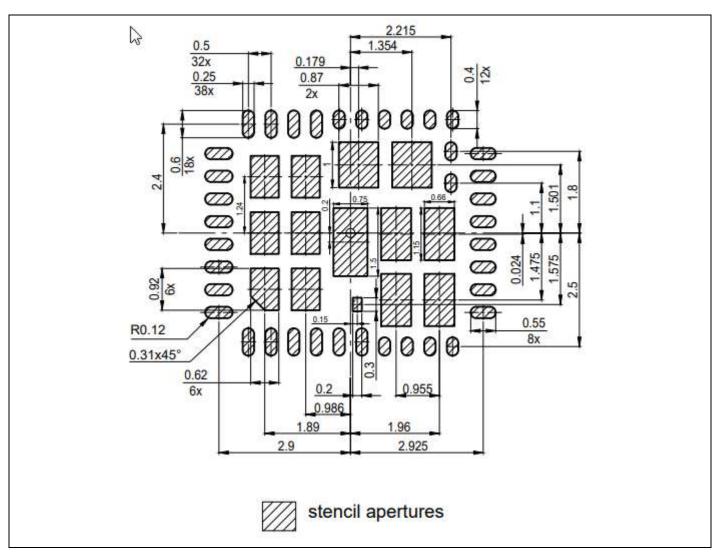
Stencil pad size and spacing (all dimensions in mm)
